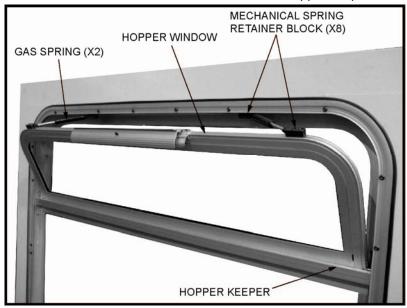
HOPPER PROP ASSEMBLY COMPONENTS
